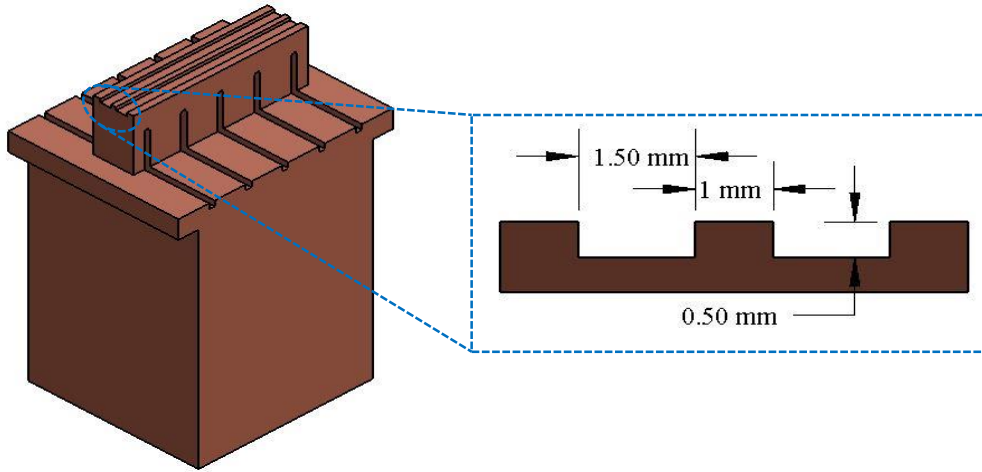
Geometrical dimensions of the mini-channel heat sink.
